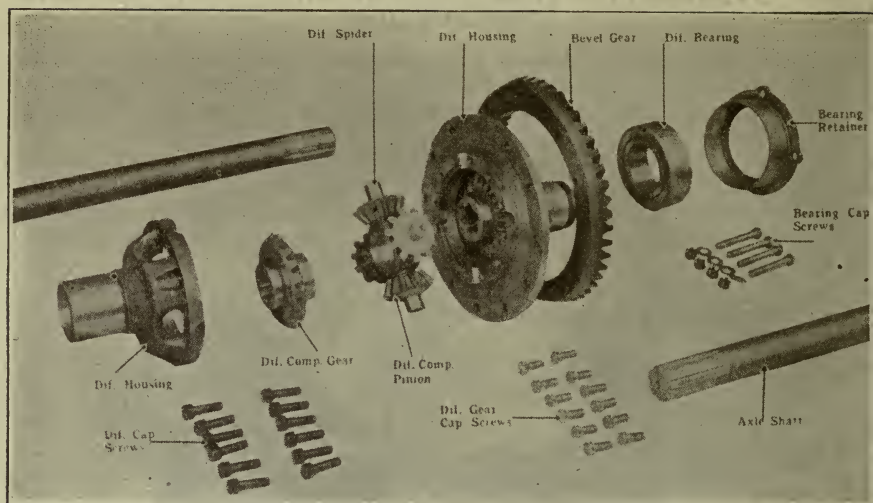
Marmon Rear Axle Parts opened up for inspection.
